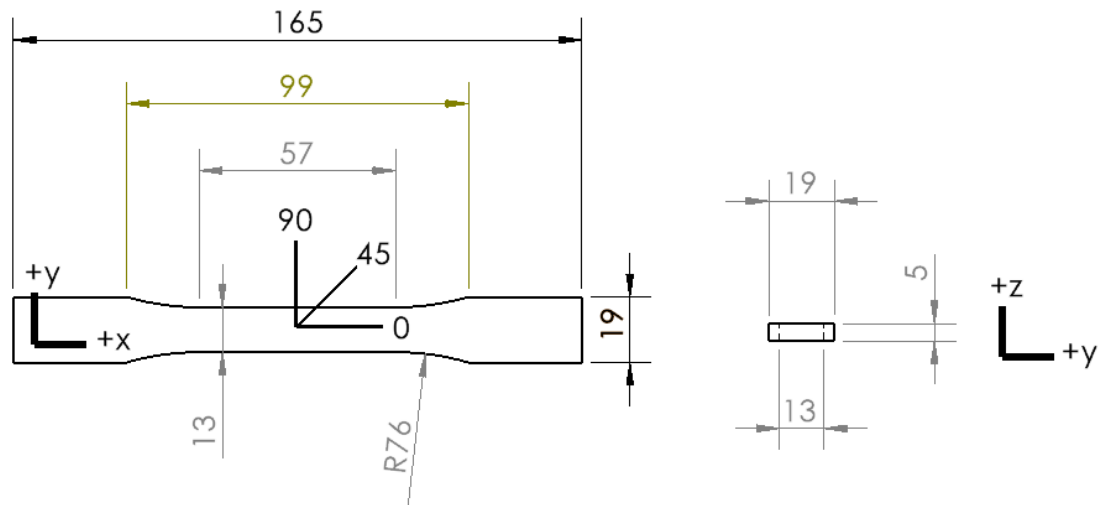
Dogbone Specimen Dimensions (mm and degrees)
